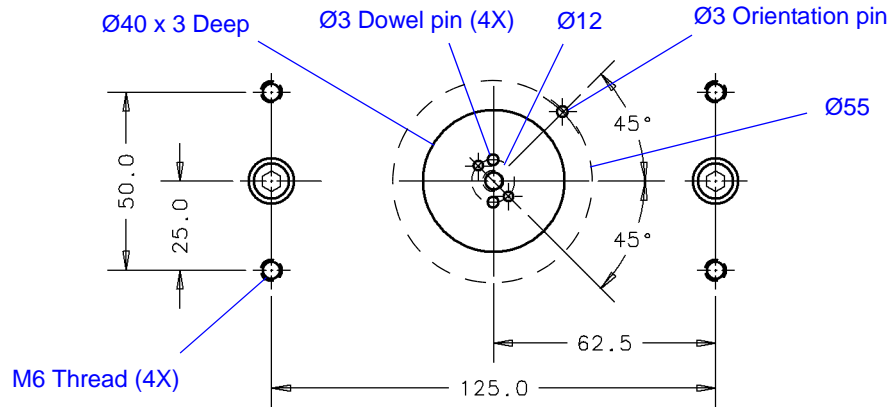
Series 5540 - Base Beam Accessory Mounting Dimensions
